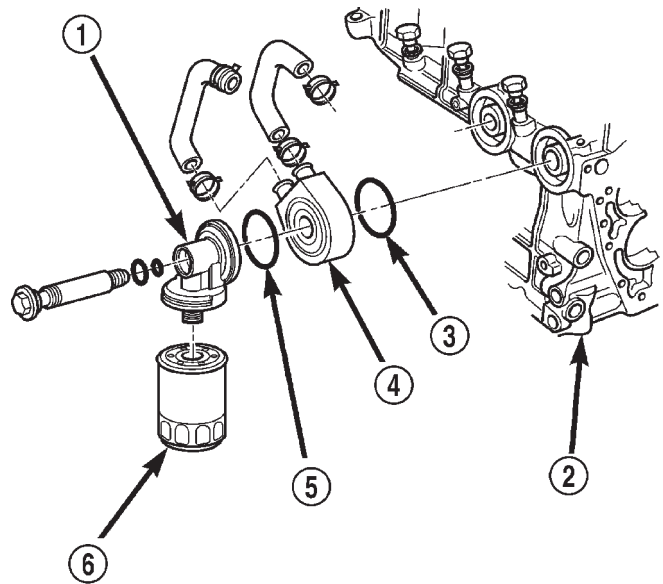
Oil Filter Adapter and Engine Oil Cooler
